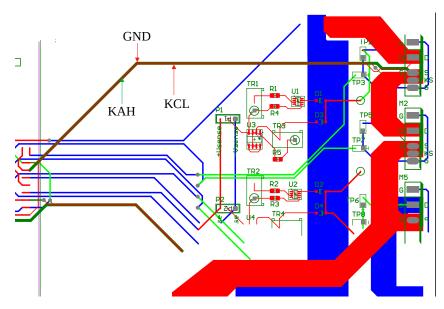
Enlargement of PCB board with tracks of interest highlighted.
